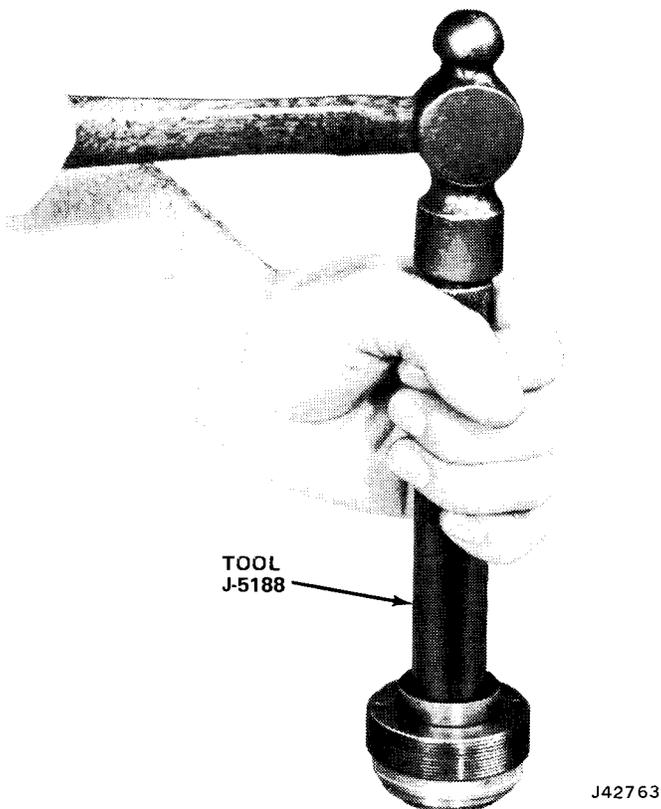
Installing Stub Shaft Seal in Adjuster Plug
